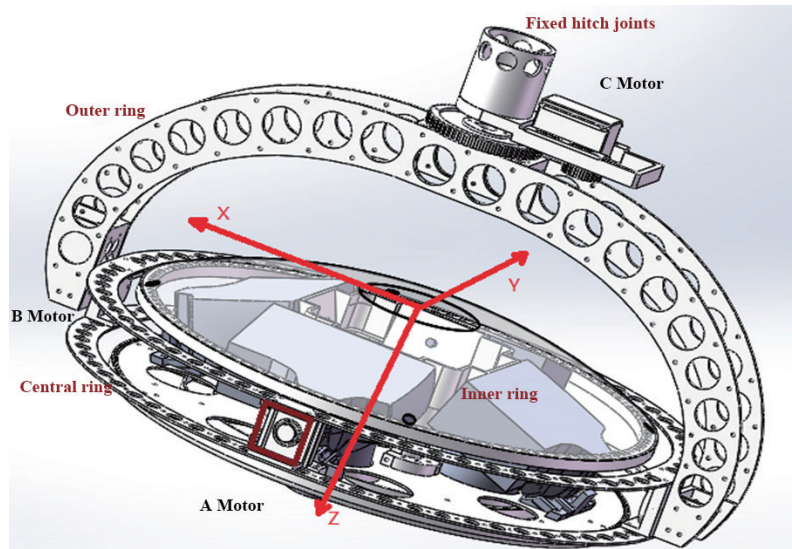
(Color online) Mechanical drawing of three-axis stable platform design.
